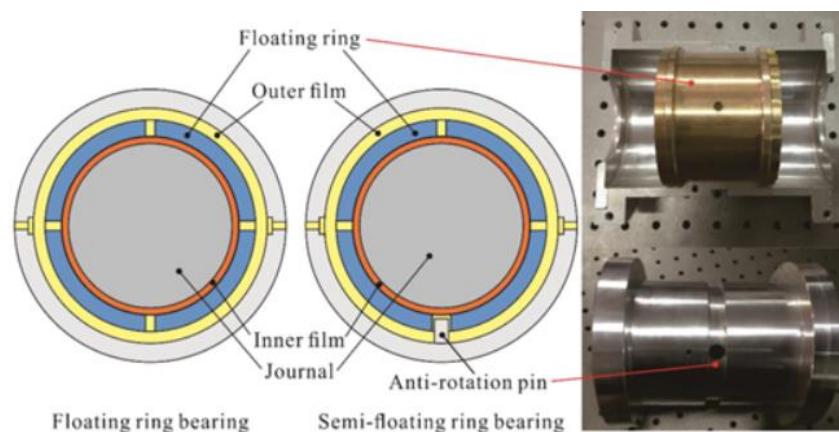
Typical structures of a floating ring bearing and a semi-floating ring bearing [49].
